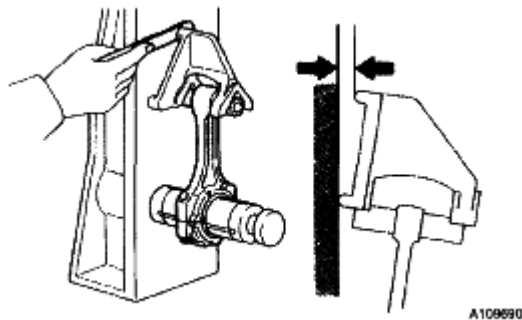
Checking Connecting Rod Alignment Using Rod Aligner & Feeler Gauge
